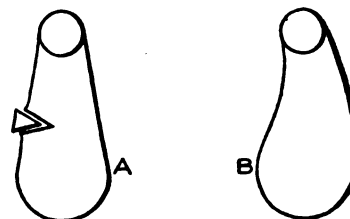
A, METHOD OF REPAIRING A FRACTURED ARM. B, ARM DISTORTED IN ADJUSTING THE CENTERS.
